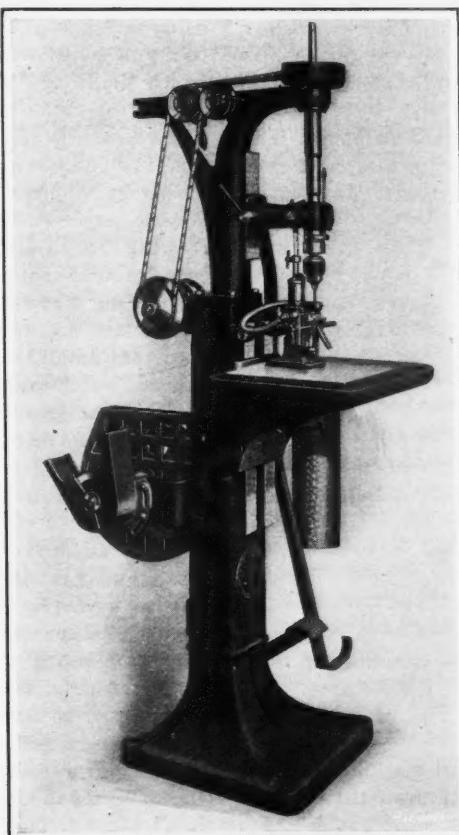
Leland-Gifford Sensitive Drilling Machine with Special Jig for drilling Cross-holes in Pins
